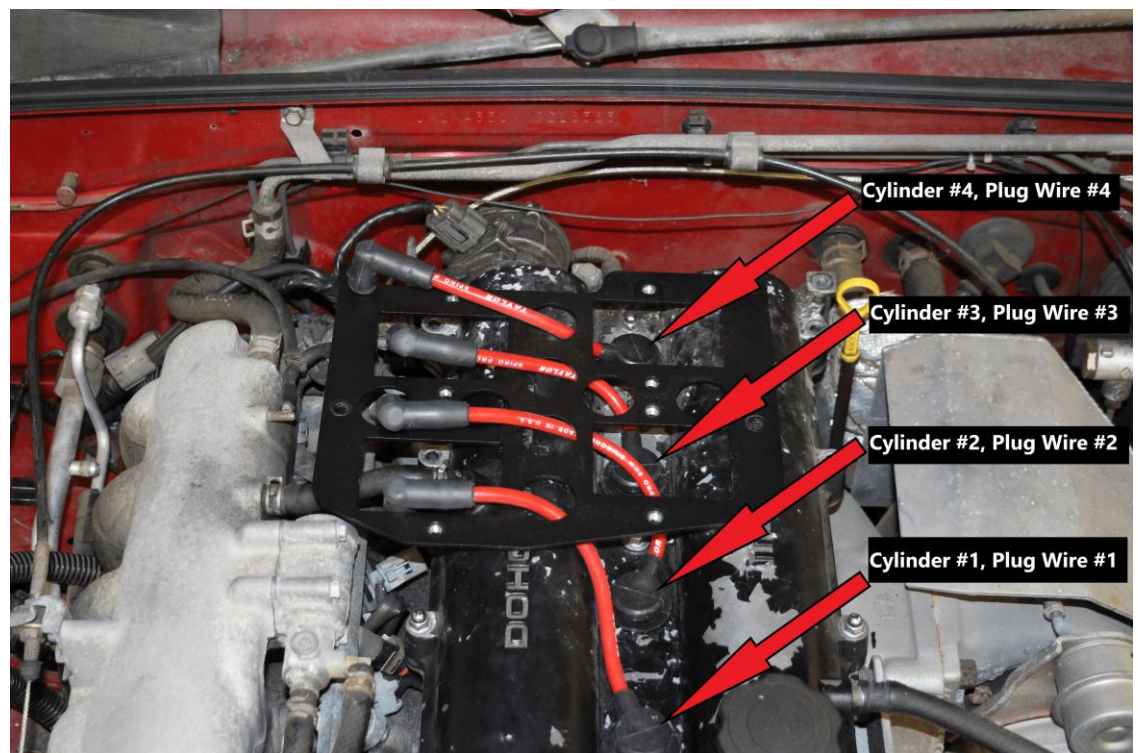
Spark Plug Wires Installed with the Coil Bracket Mocked Up
